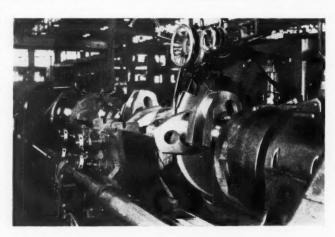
Chankshaft bearings and pins are ground to finish size in this Landis crankshaft grinding machine.
